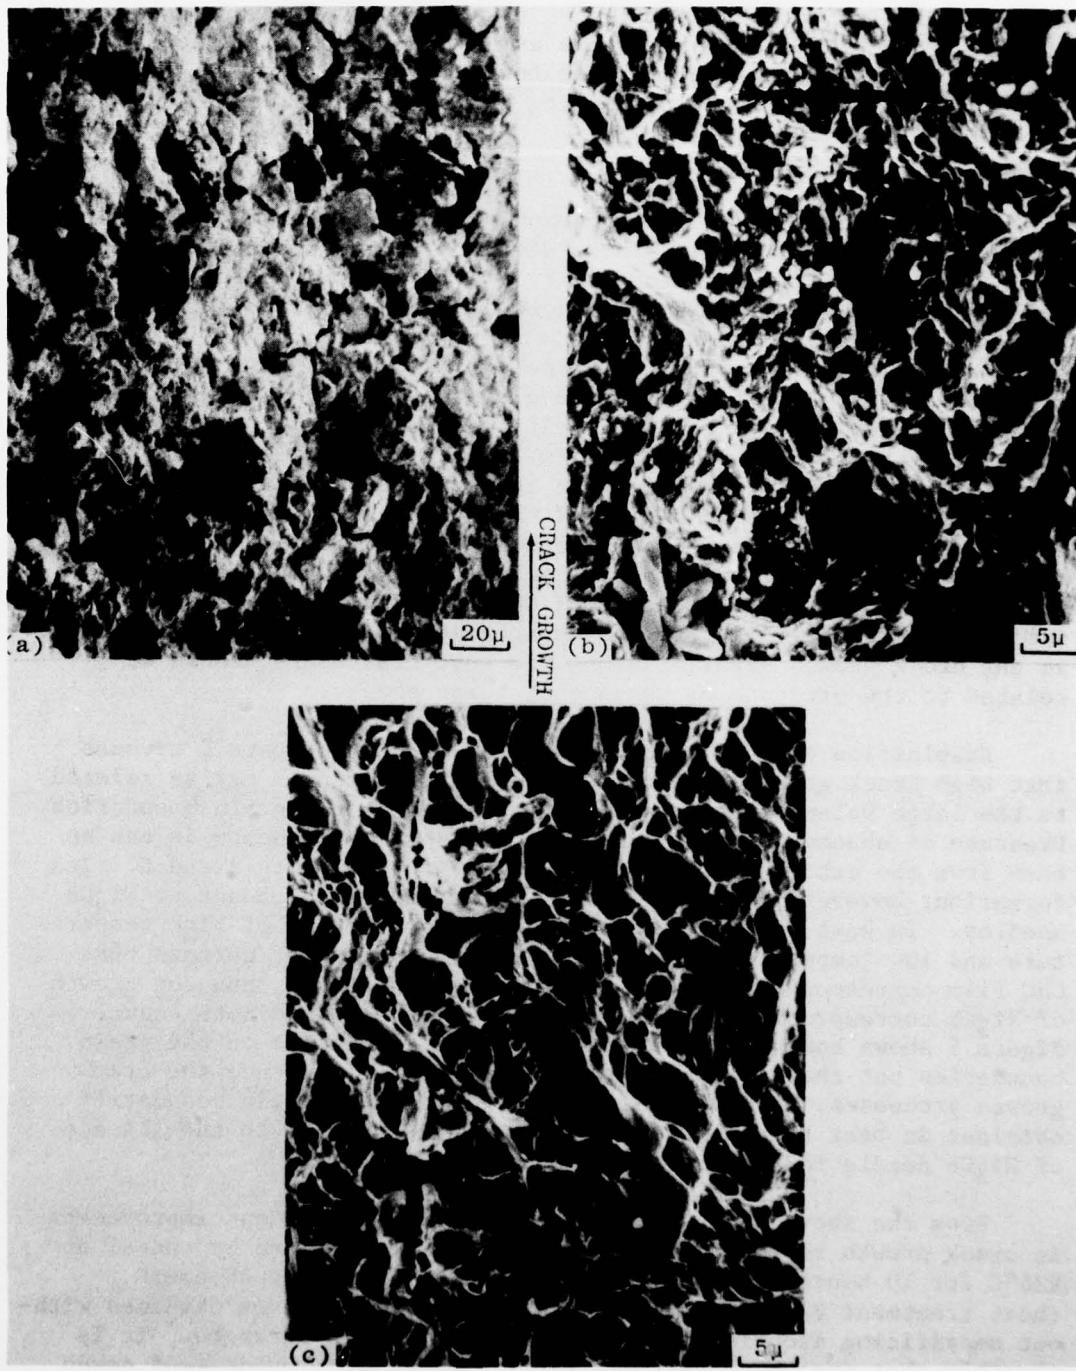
Fracture surfaces for heat treatment E
